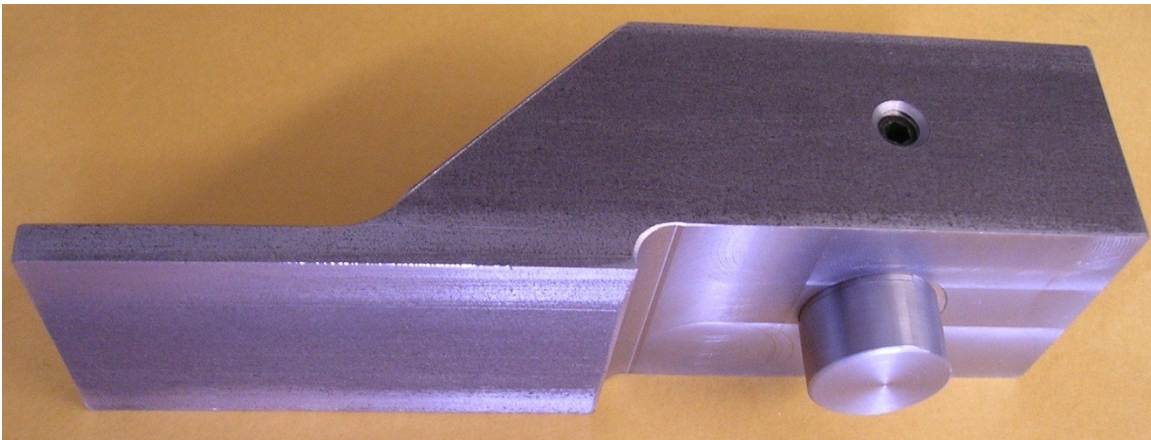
(a): Front view of back loading fixture showing pin and set screw which bears against the pin
